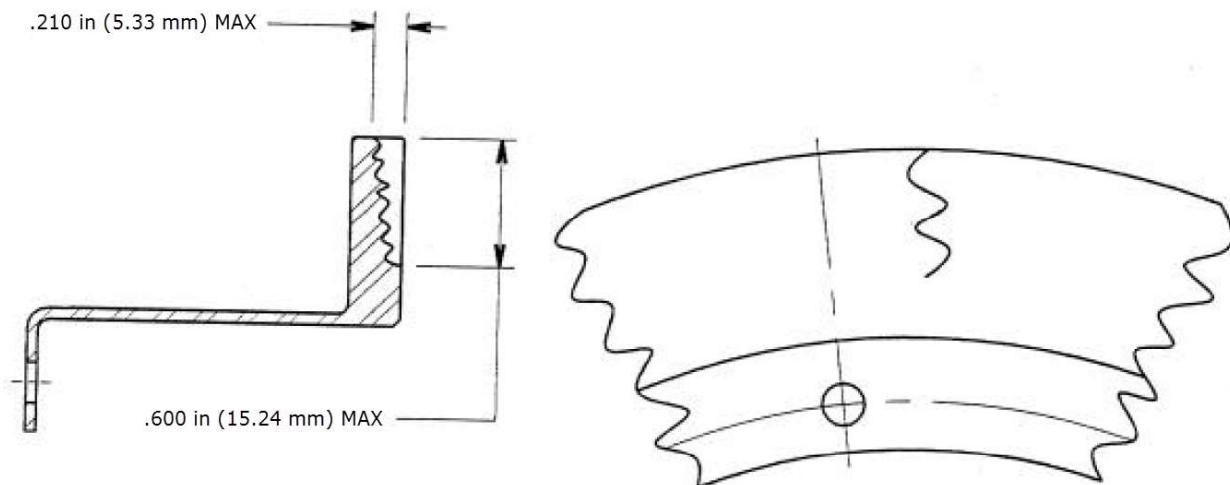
Reference Views of Crack Limits in Brake Disc Wear Surfaces
